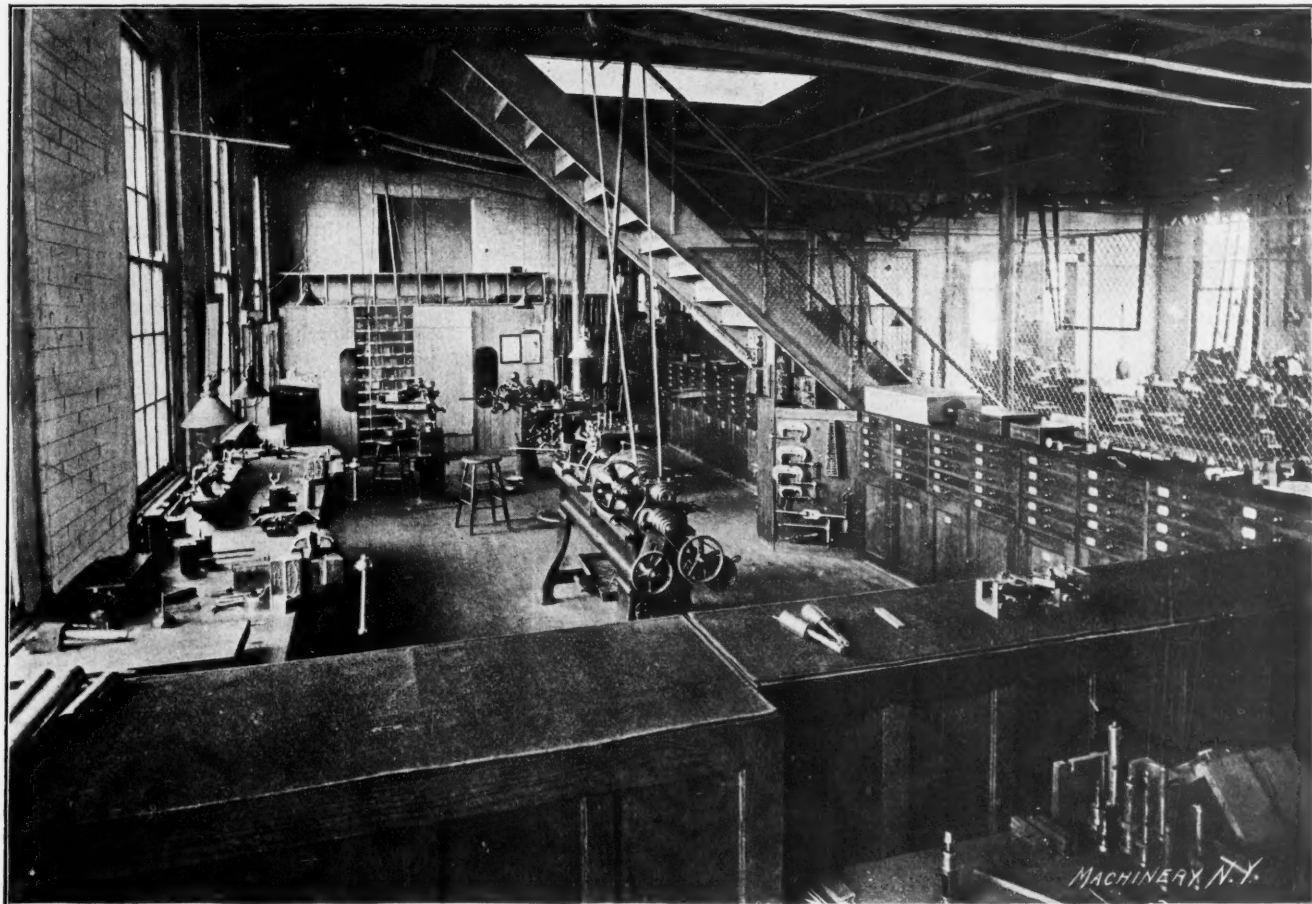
View in Tool Room. Card Indexes and Drawers and Cases for keeping Tools are shown at the right.
